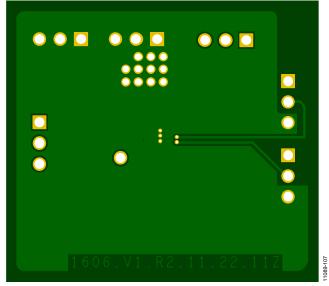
ADP1606 Boost Application PCB Bottom Layer
